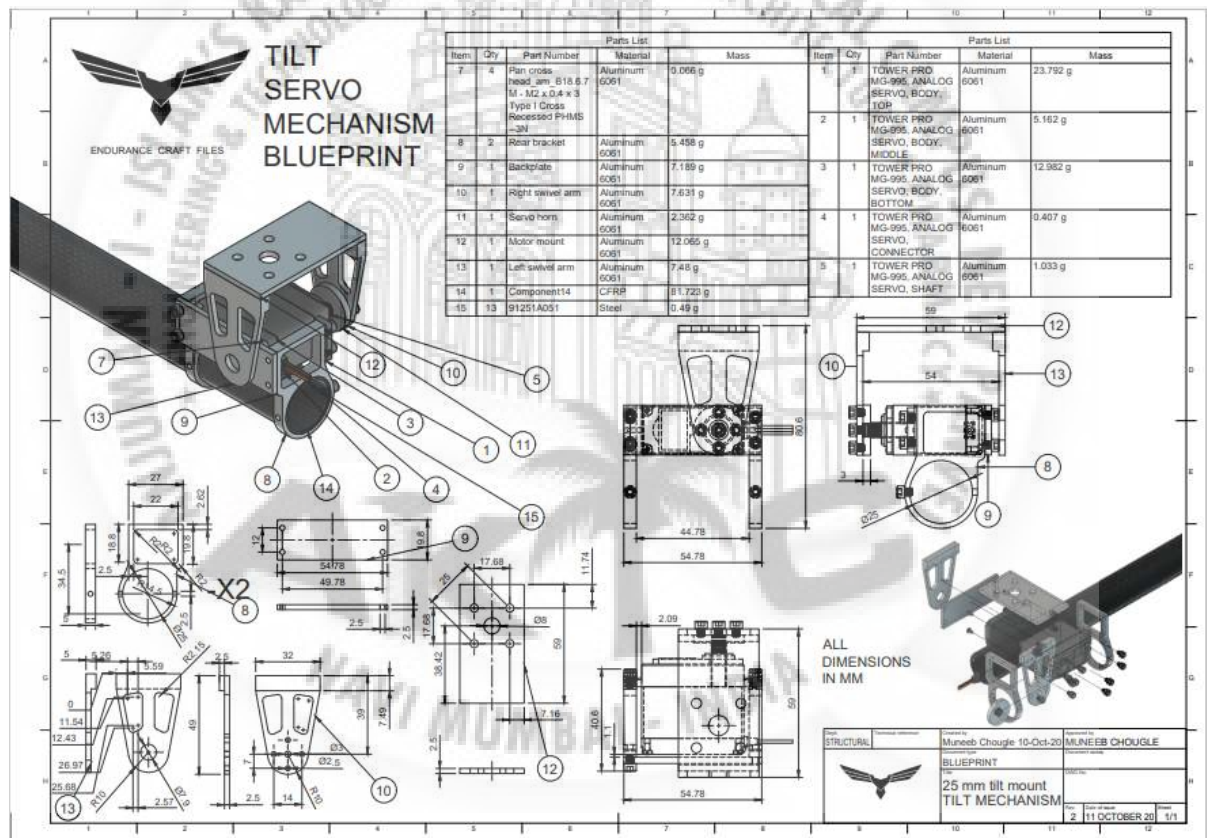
Tilt rotor mechanism assembly blueprint.
